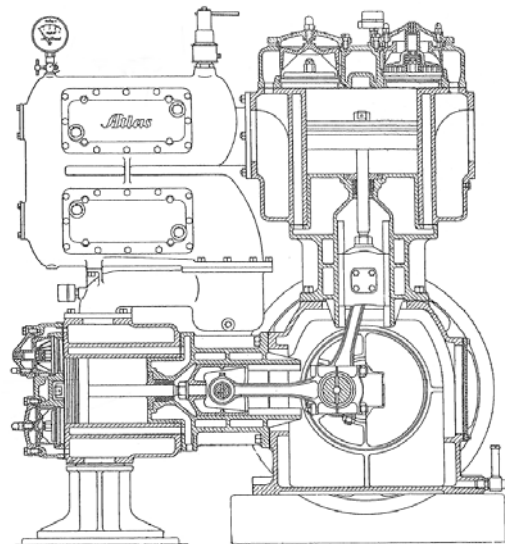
Sectional drawing of the test compressor Atlas Copco AR1⁷
